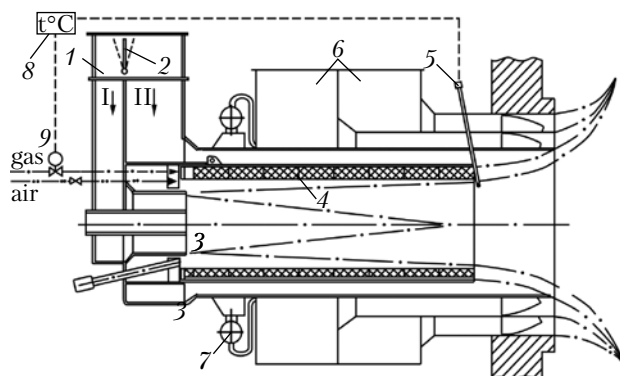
Configuration of TCP burner for TPP-210A boiler: 1 – pulverized coal burner box; 2 – butterfly damper; 3 – incendiary device; 4 – muffle chamber for pulverized coal thermal treatment; 5 – temperature sensors; 6 – secondary-air burner box; 7 – existing gas collector; 8 – temperature controller; 9 – controller of gas feed for TCP
